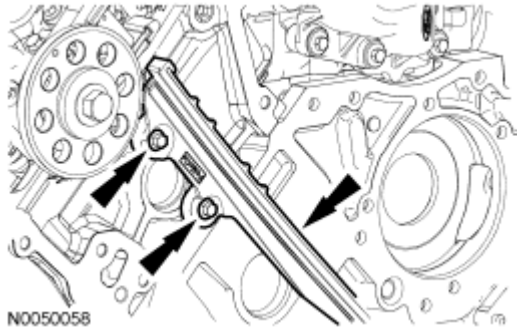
Locating RH Primary Timing Chain Guide Bolts
